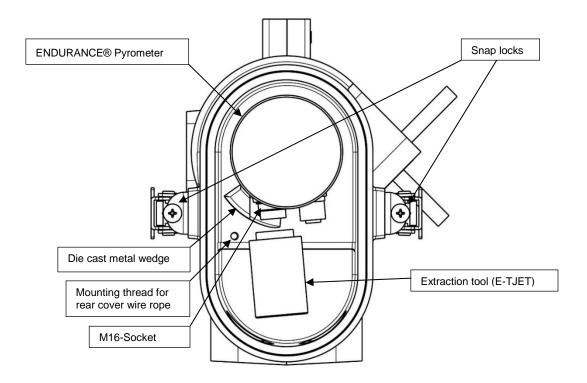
Extraction tool (E-TJET) attached to Endurance® M16 Connector
